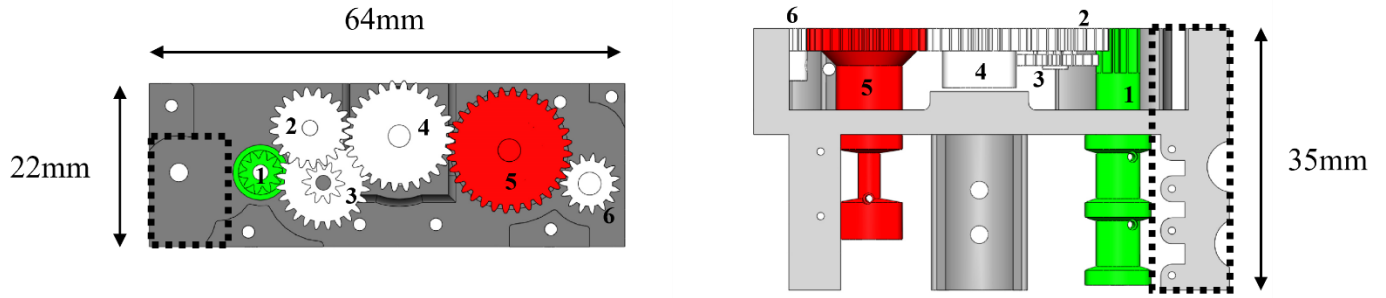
Gear combination of the SSA. Gear 1: gear-embedded spool for the flexor and encloser (number of teeth: 10). Gear 2: spur gear to transmit torque from gear 4 to gear 3 (number of teeth: 20). Gear 3: compound gear to transmit torque from gear 2 to gear 1 (number of teeth: 10, 24). Gear 4: spur gear connected to the main motor (number of teeth: 28). Gear 5: gear-embedded spool for the opposer (number of teeth: 32). Gear 6: gear to enable slack-enabling for the opposer (number of teeth: 15). The dashed-line area indicates the slack-enabling mechanism section for the flexor and encloser.
